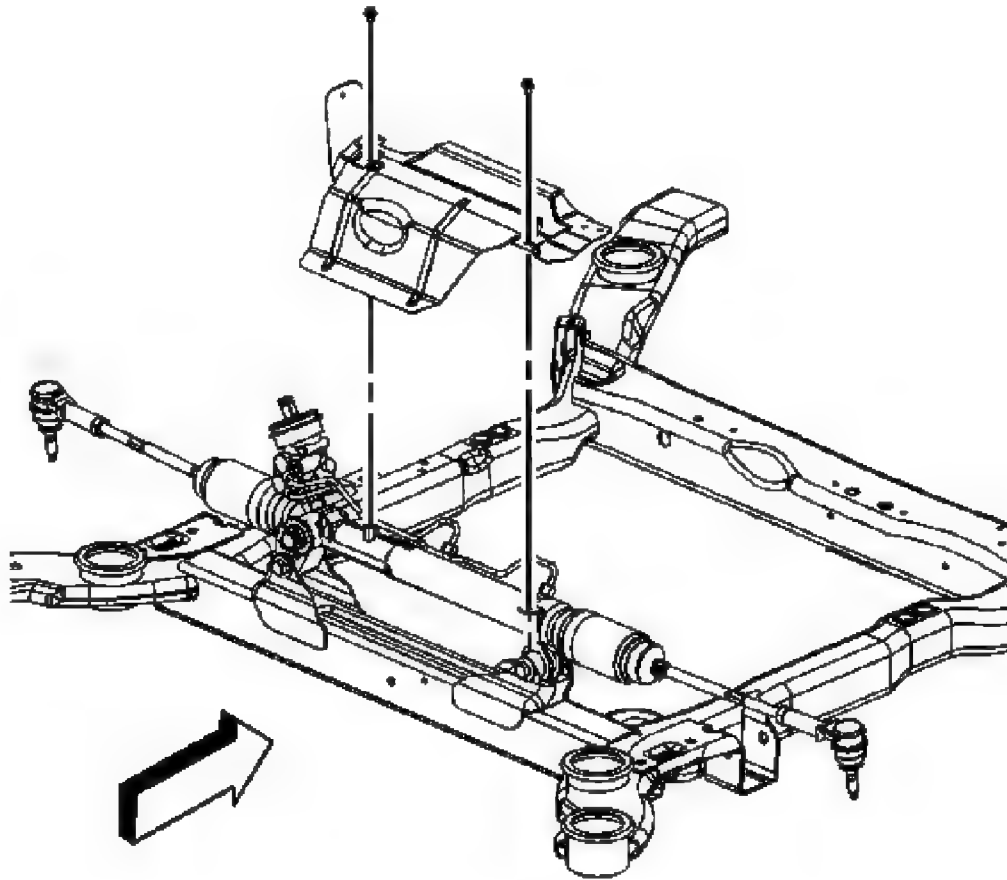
View Of Steering Gear Heat Shield & Bolts
